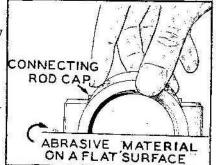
REDUCING CON-NECTING ROD CLEARANCE
